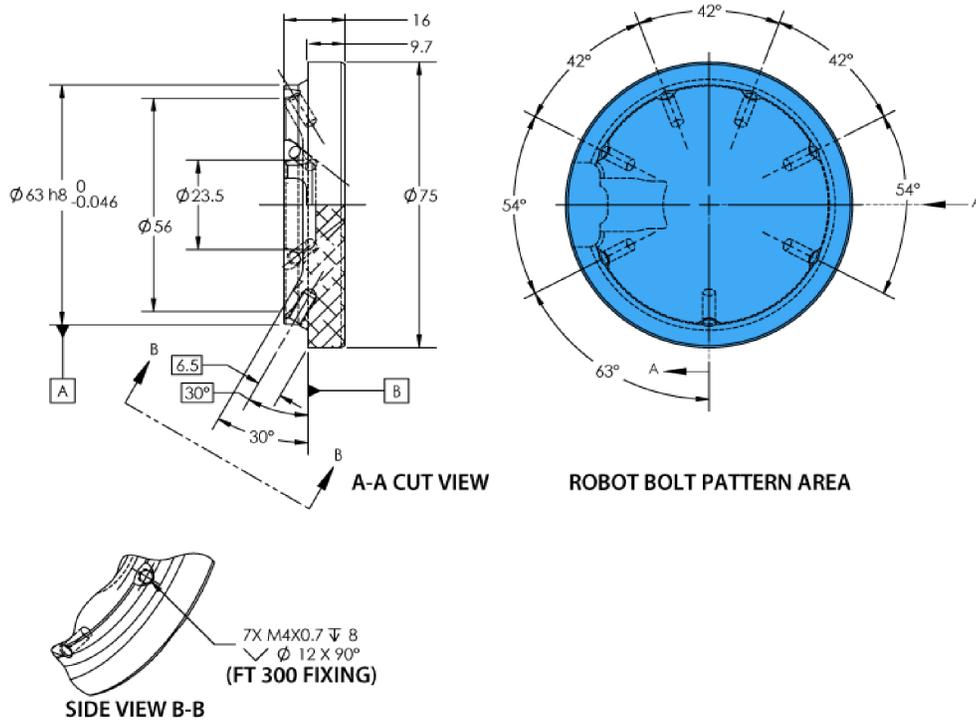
Technical dimensions of the blank coupling for the FT 300.
